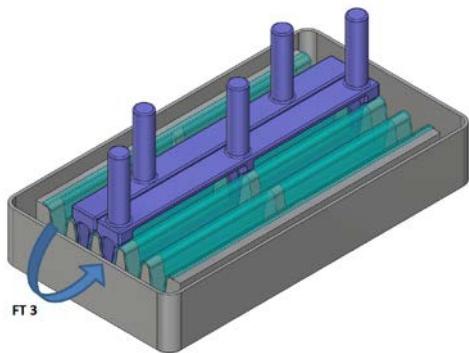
Filter Tool 3 Removal & Insert into 3rd Slot
